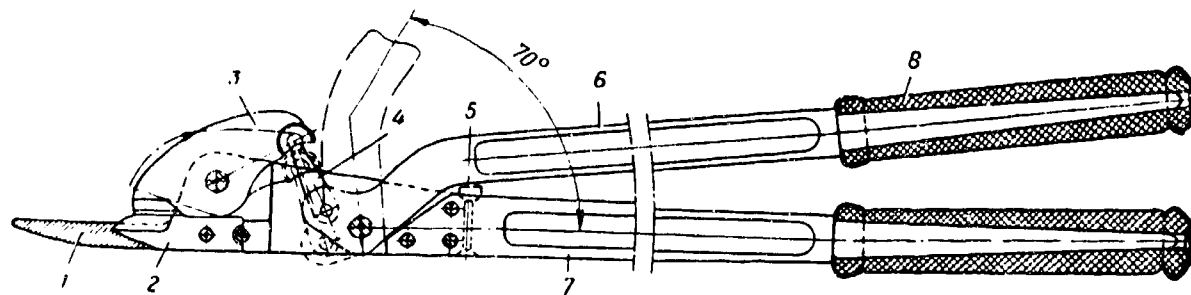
Shears for Cutting Steel Cable: 1 - steel lip; 2 - stationary cutter; 3 - mobile cutter; 4 - pivot; 5 - stop block; 6 - upper lever; 7 - lower lever; and 8 - handles.
